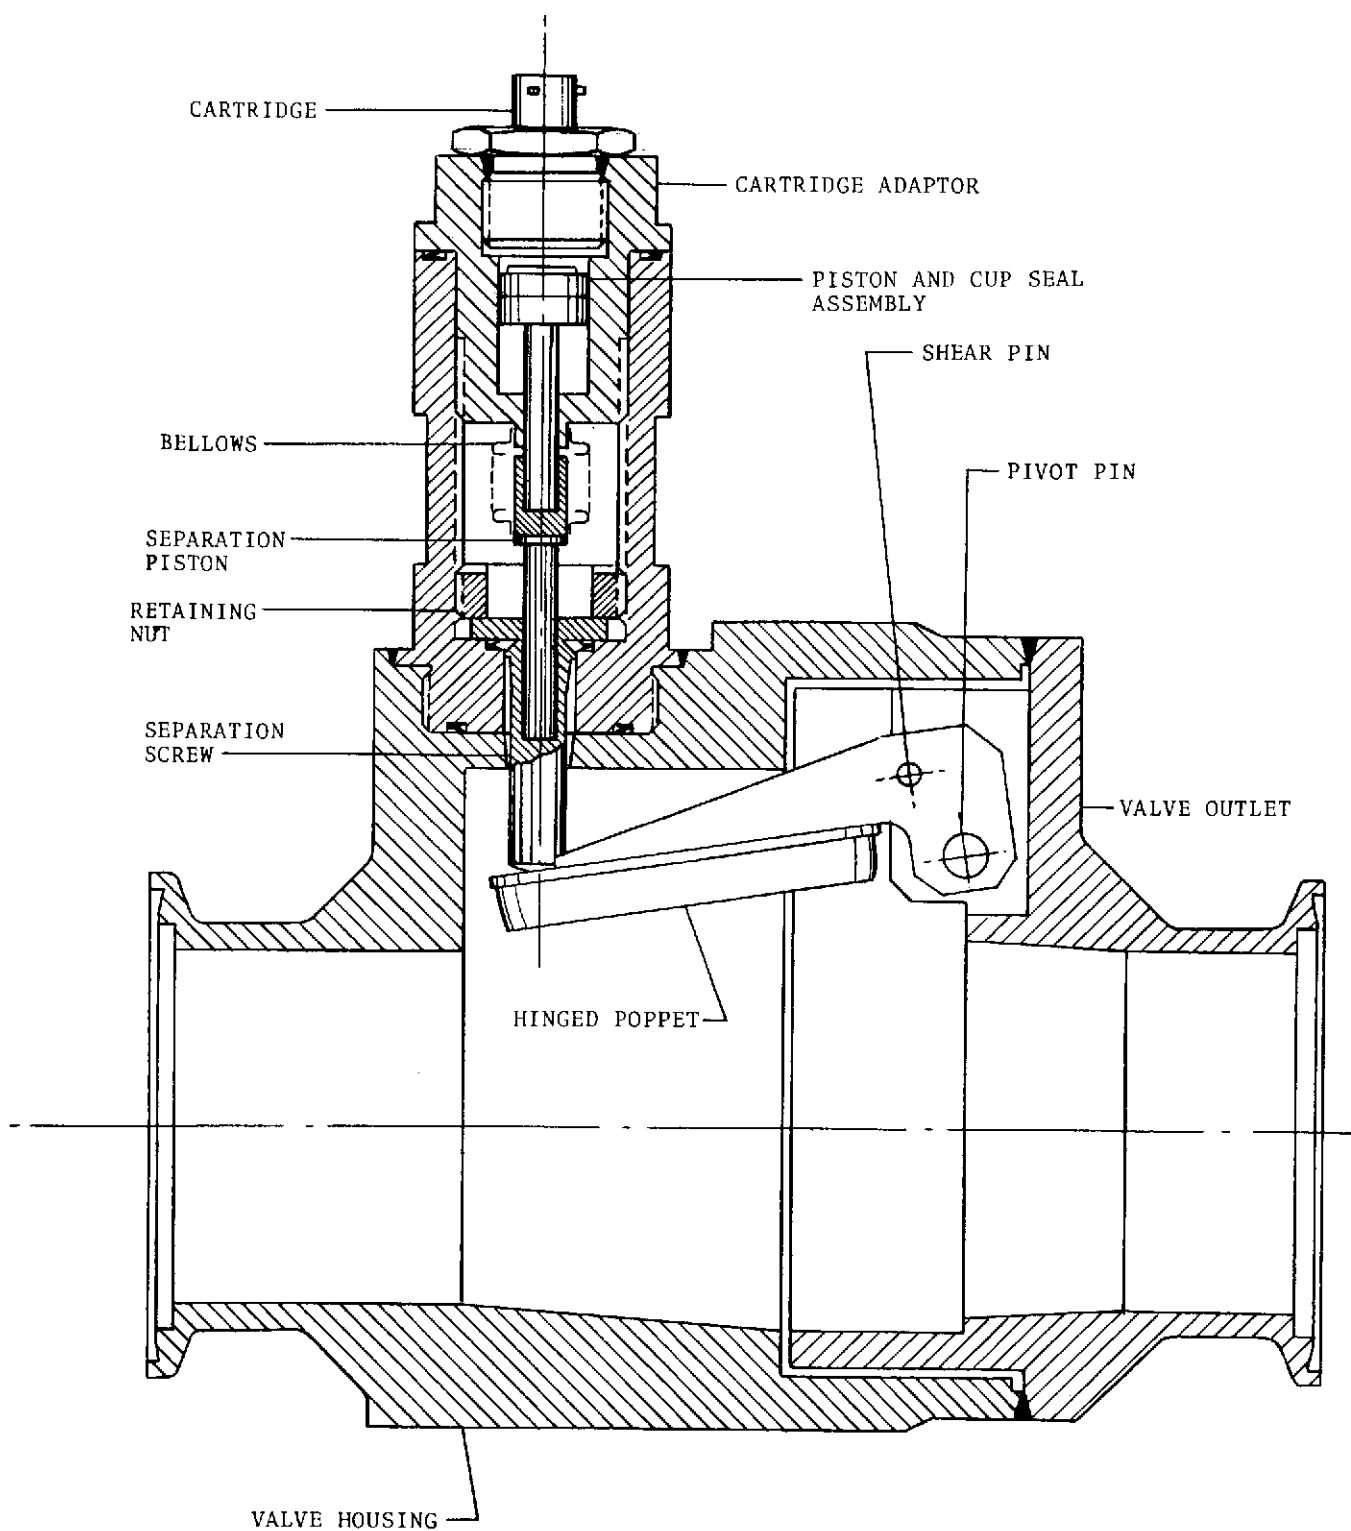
2-1/2 INCH EXPLOSIVELY ACTUATED VALVE
